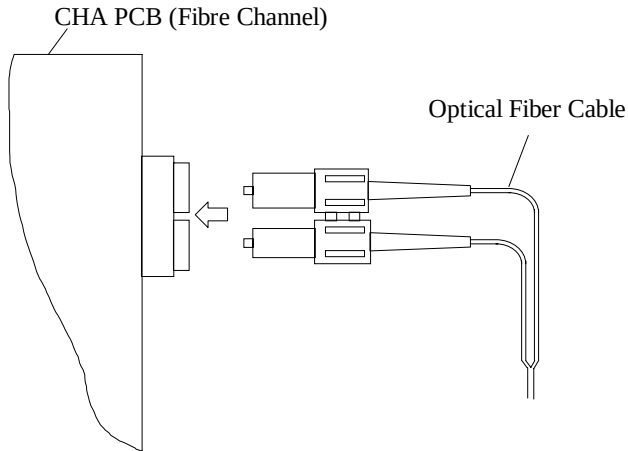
Connection of Optical Fiber Cable
